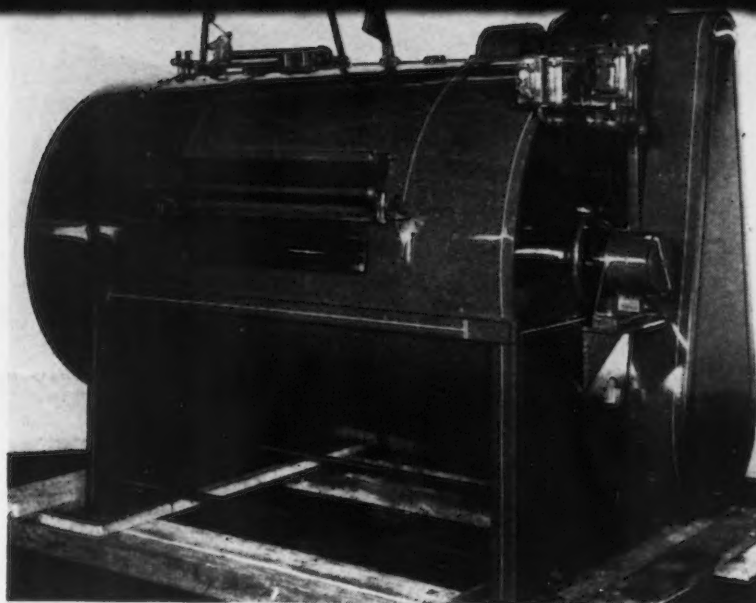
The first redesign used a welded tub and welded end brackets. In this design the tub or outer shell was made as a separate unit and mounted on the end brackets.
